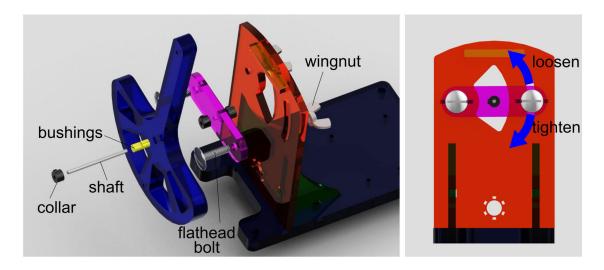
Left: The contact force adjustment mechanism is built with durable commercial hardware and can be easily disassembled. Right: the shaft can be raised or lowered to adjust the contact force on the friction drive wheels.
